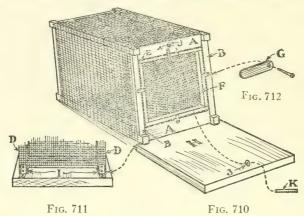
How the Inner Cage Fits into the Outer Cage
